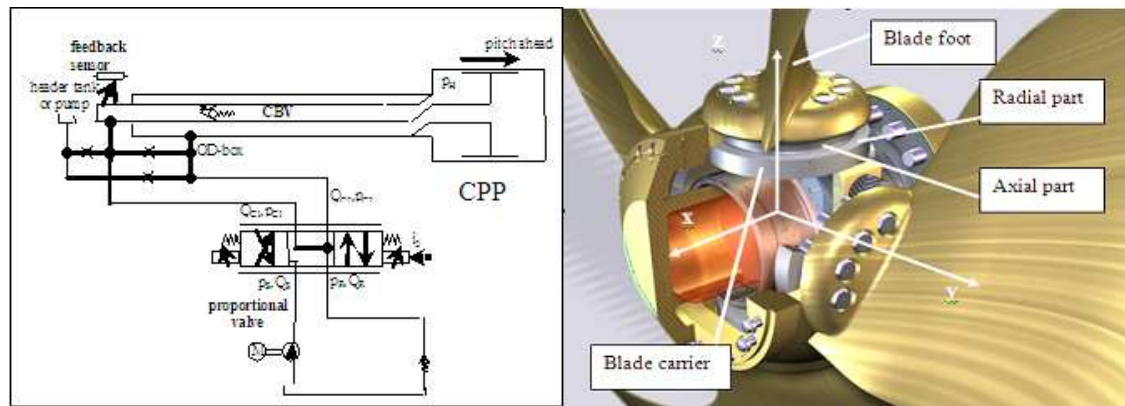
Hydraulic scheme of a CPP (left) and its main parts (right). Blade bearing is the bearing that connects the blade foot, blade carrier and hub. Blade bearing has the radial and axial parts. Radial part of blade bearing has the inner side (closer to x axis) and outer side. Source: Wartsila
